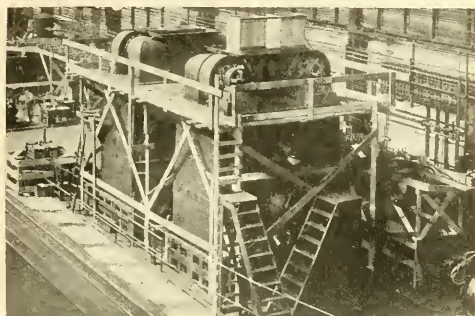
TWO MAIN PROPELLING MOTORS COUPLED TOGETHER FOR LOAD TEST
